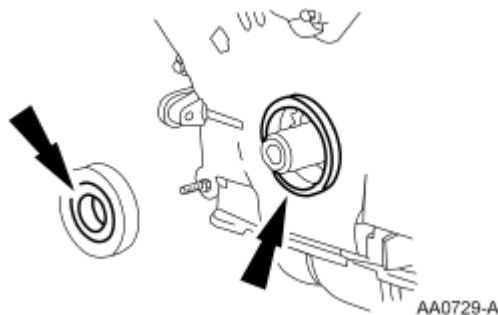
Lubricating Engine Front Cover And Crankshaft Front Seal Inner Lip
